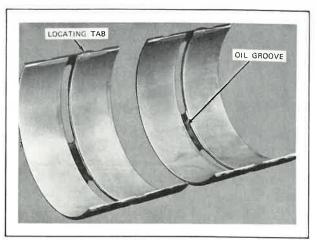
CONNECTING ROD BEARING SHELLS.
